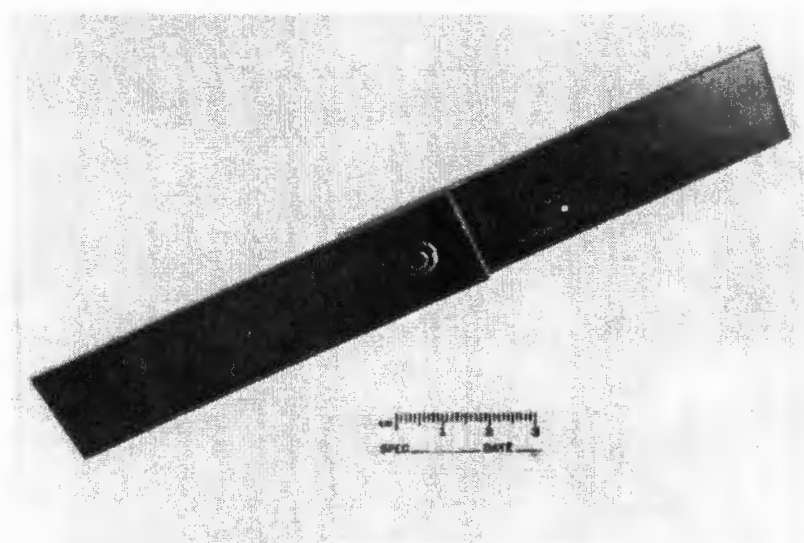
Representative plug weld specimen in the as-received condition; reduced 25%.
